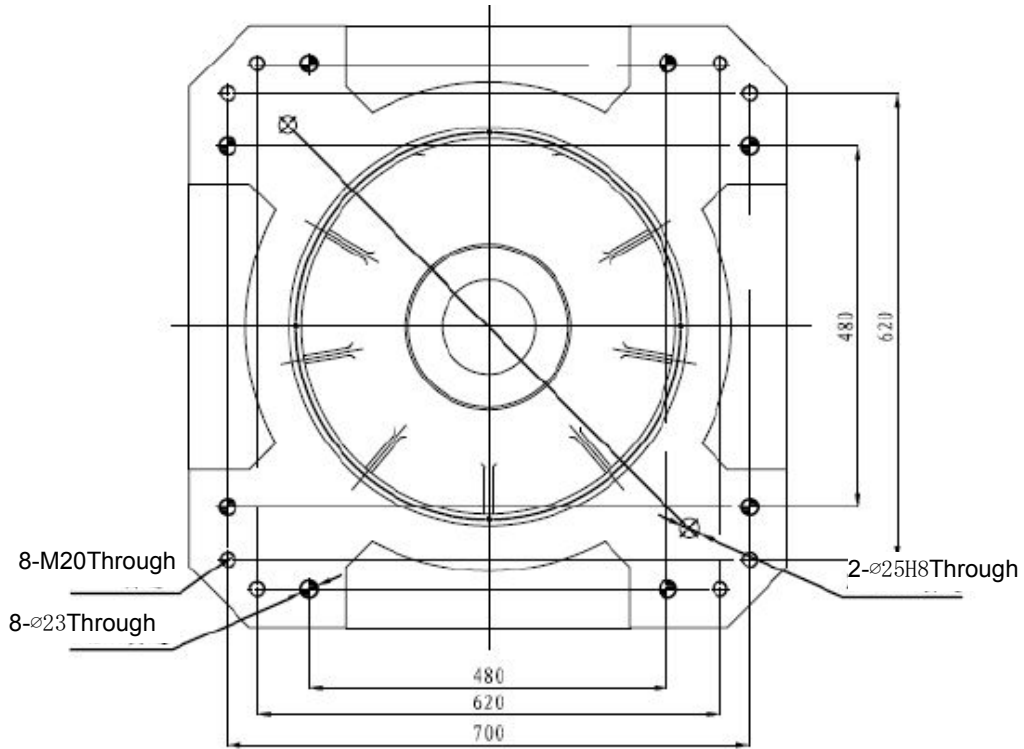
Base Mounting Hole Dimensions of SR165/ SR210
